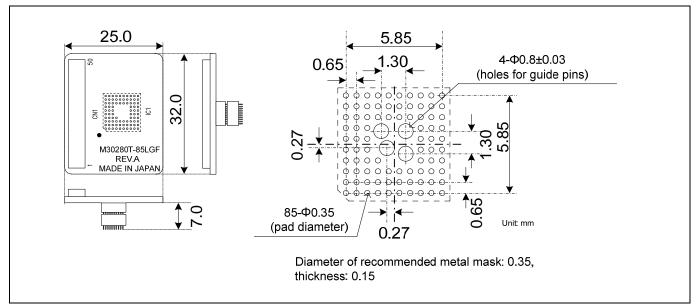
External dimensions and a sample foot pattern of the converter board M30280T-85LGF
